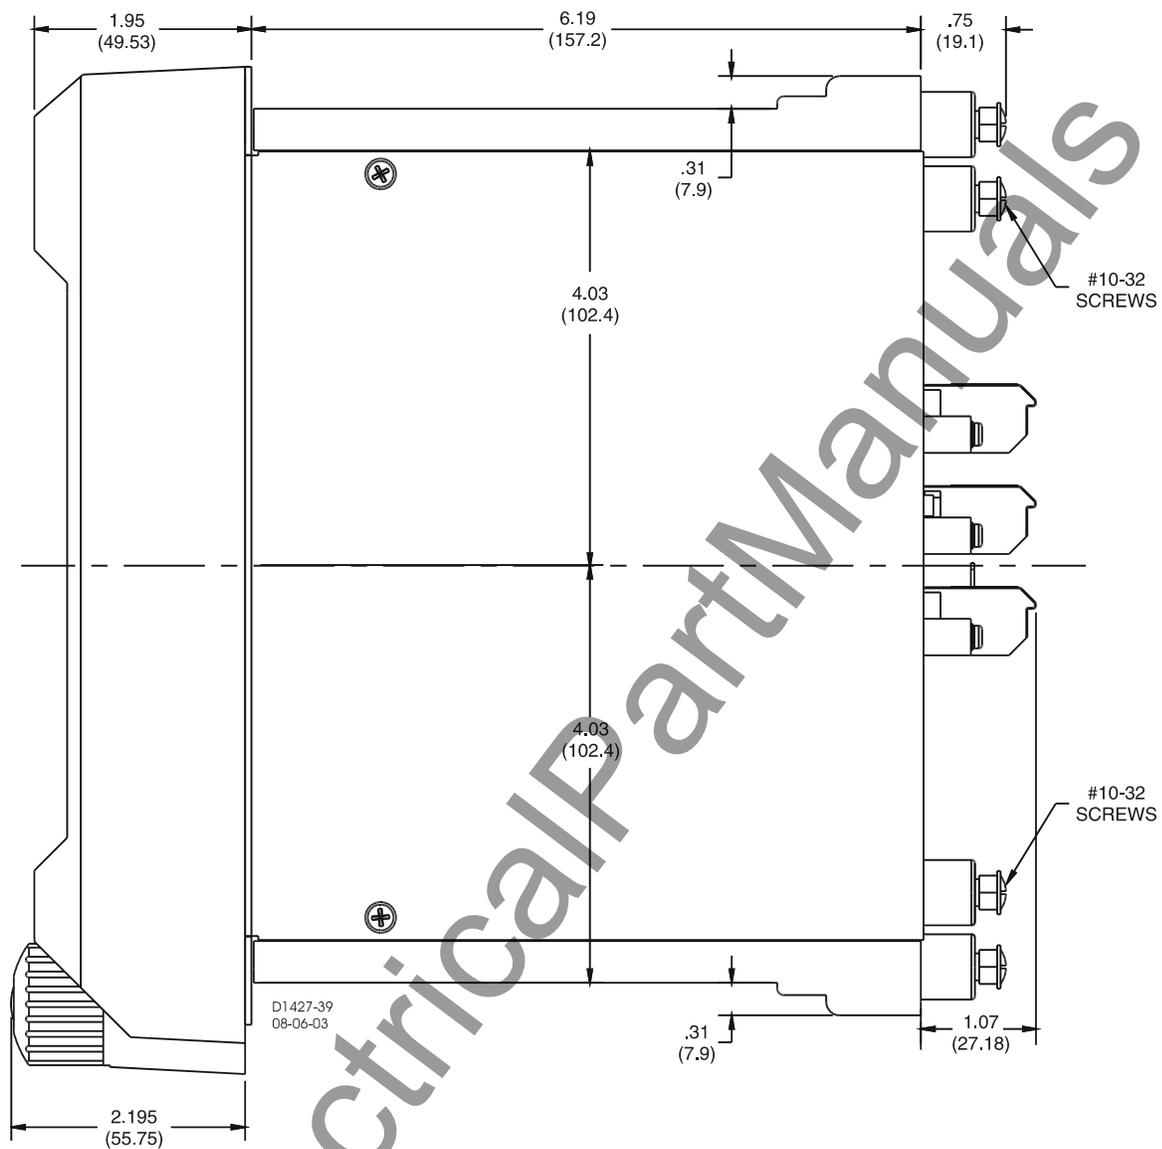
S1 Case, Double-Ended, Semi-Flush Mounting, Outline Dimensions, Side View
